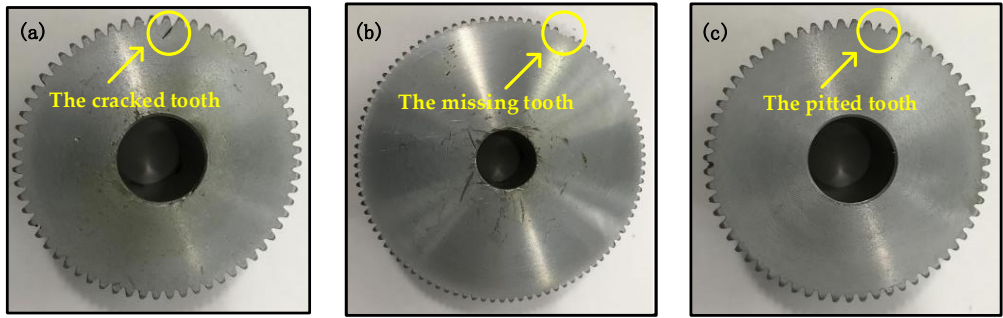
Examples of faulty gears: (a) the cracked tooth; (b) the missing tooth; (c) the pitted tooth.
